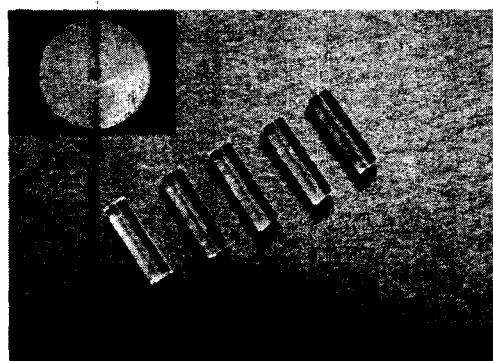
Photograph of Quartz glass ferrule by cutting machining
